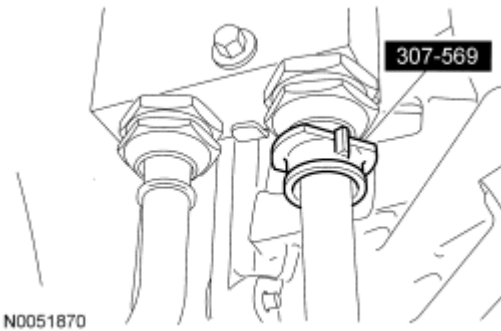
Disconnecting Transmission Cooling Tubes Using Special Tool (307-569)
